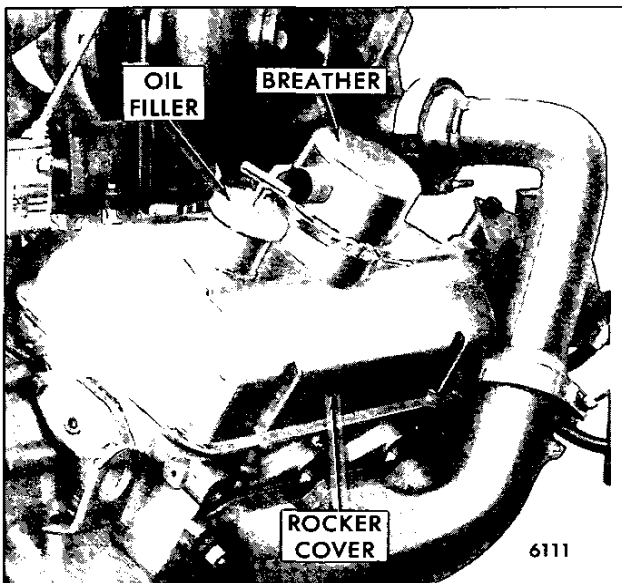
Rocker Cover Breather Mounting (6V-53 Engine)
